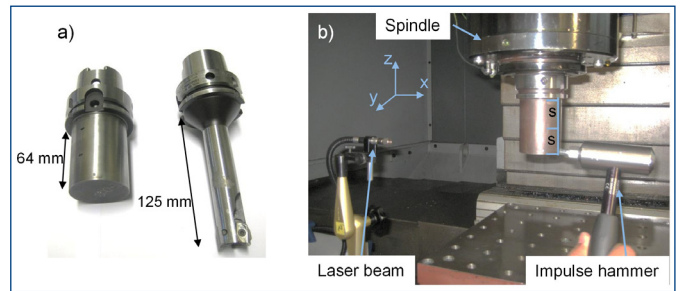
a) Cylindrical adapter and milling tool b) measurement setup for receptance measurement
